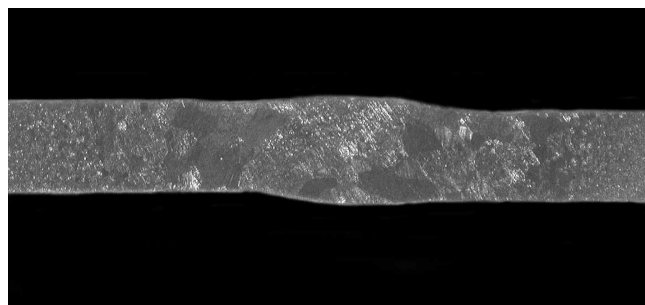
Macrograph of the cross section of butt joint of titanium alloy Ti6Al4V sheets 1.5 mm thick laser welded with the HPDL laser, joint no. 1 (P1) (Table 5)
